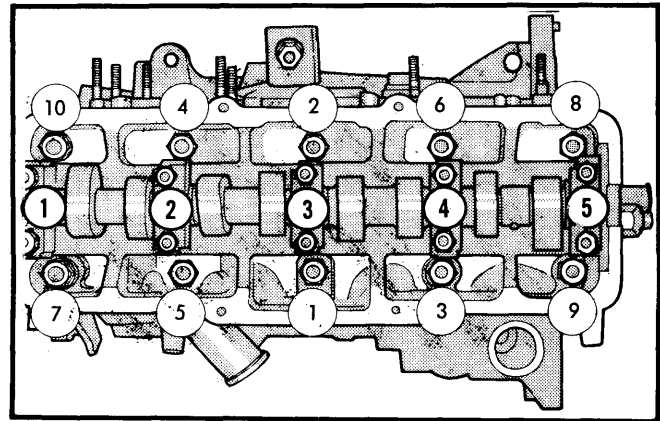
Cylinder Head Tightening Sequence (Loosen in Reverse Order — No. 10 to No. 1)
